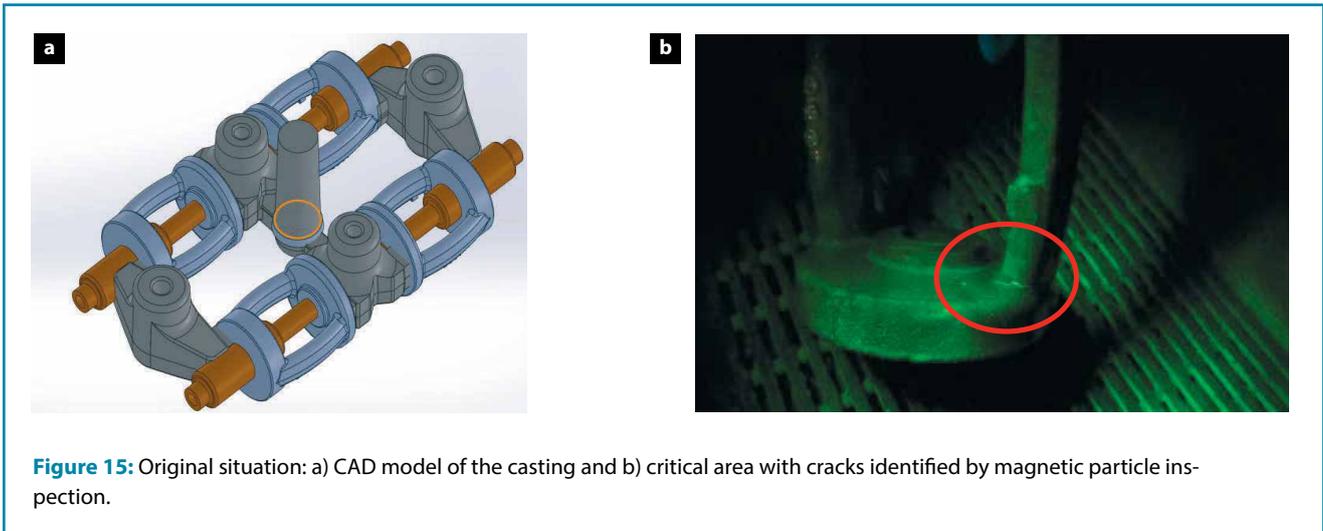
Original situation: a) CAD model of the casting and b) critical area with cracks identified by magnetic particle inspection.
